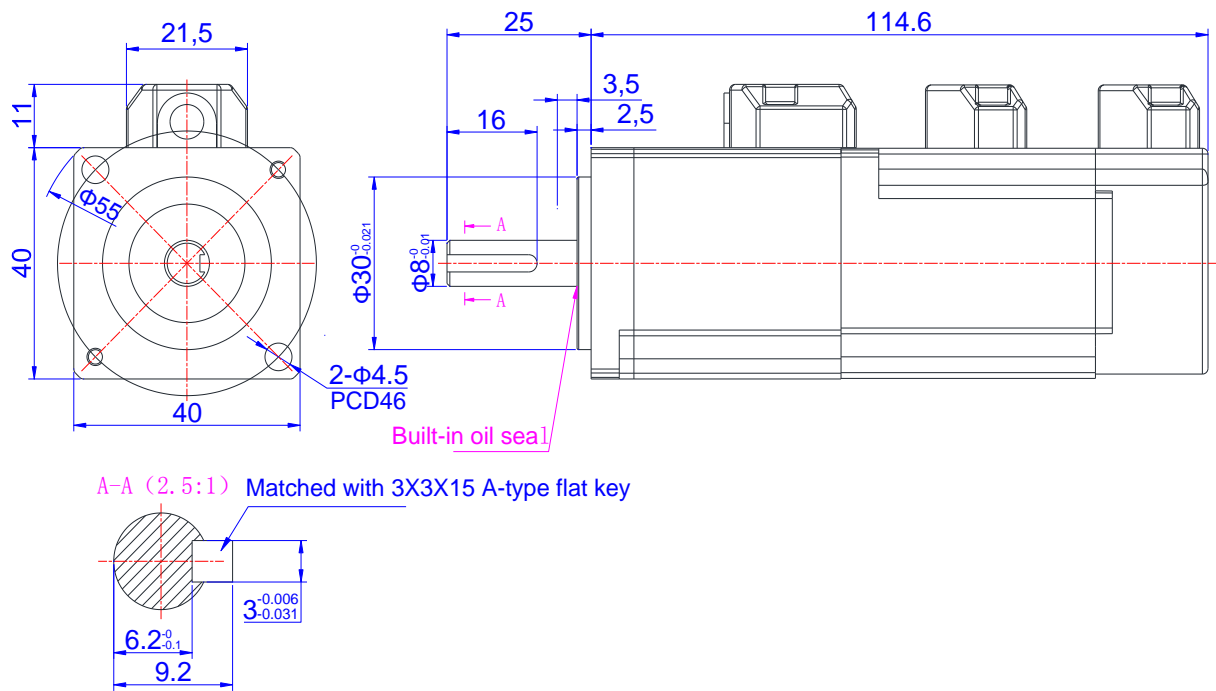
Outline dimensional drawing of ME040 series (with magnetic brake)
